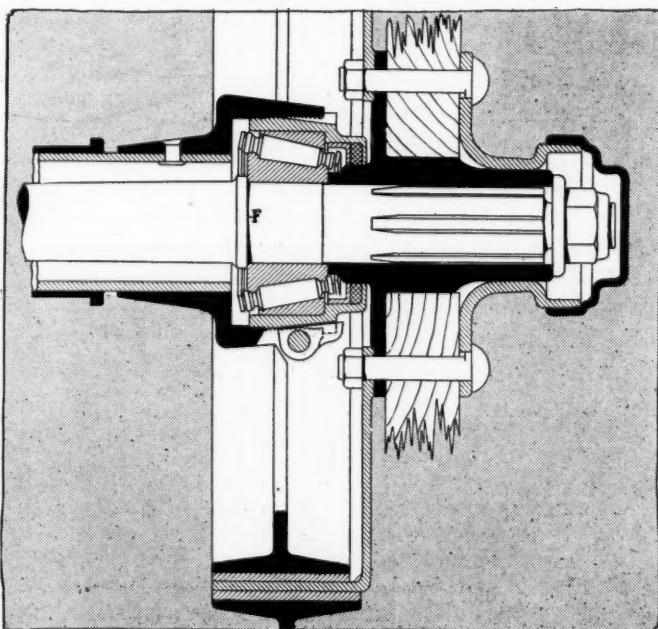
Section of Pierce rear wheel, showing roller-carried hub
